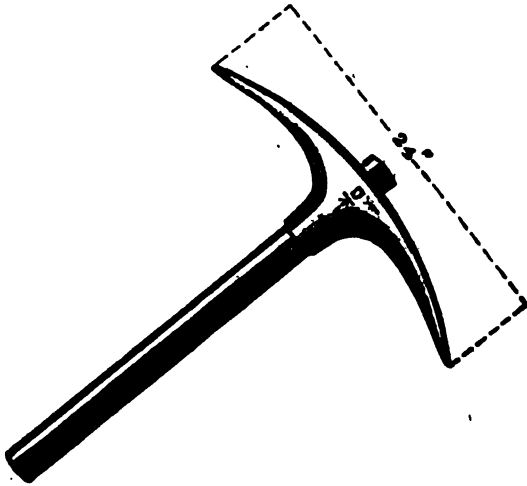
is a sketch of a pick. The socket DE into which the handle fits should be from $3\frac{1}{2}$ to 4 inches deep.
